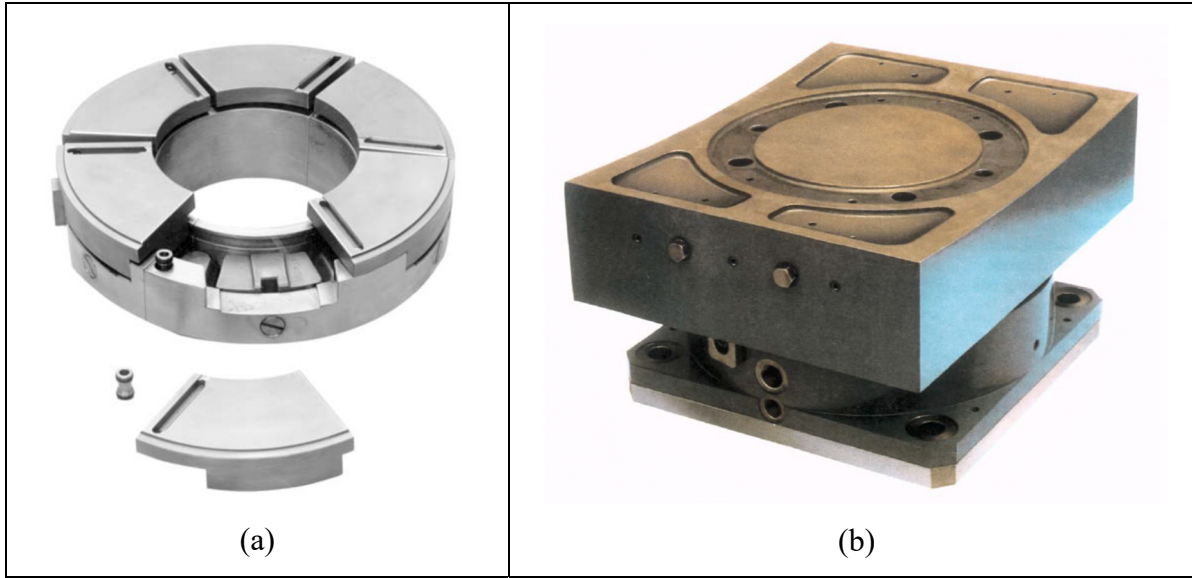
Tilting shoe bearings; a) Leading edge groove thrust bearing (Taken from Kingsbury guide (2019, p. 12), b) Tilting pad journal bearing (Taken from SKF Catalogue (Hydrostatic shoe bearing arrangement))
